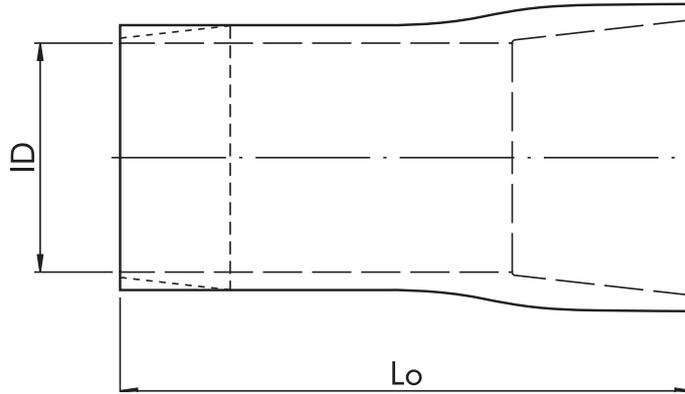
Minimum cut length (L_o) for pipe Taper bell - Taper spigot
